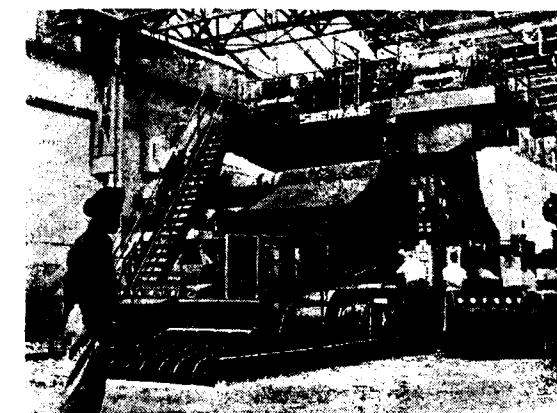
4-High reversing strip cold mill roll dia. 1380/460 mm, barrel length 1700 mm.
